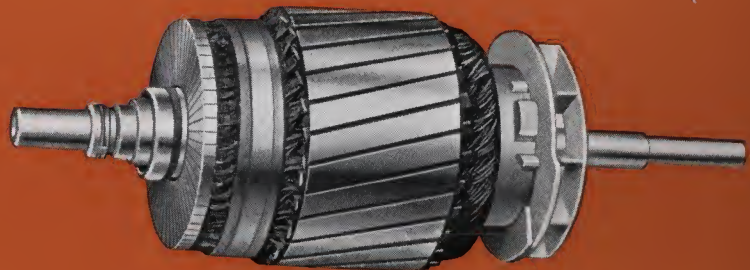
Mica Insulation is used between the commutator bars and the commutator hub. The outside diameter of the armature is ground to size on all diameters and polished on the bearing surfaces. It has a larger diameter through the rotor iron for greater rigidity.
